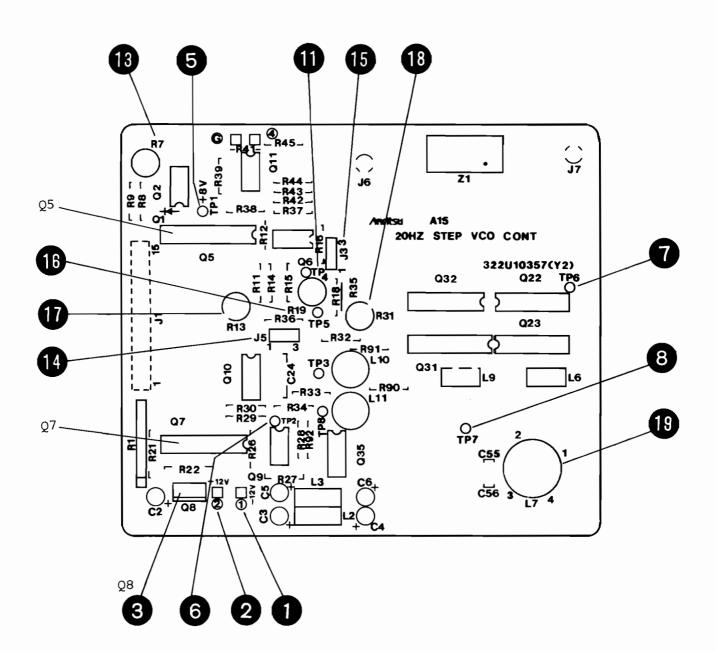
(a) A1-A15 20 Hz STEP VCO CONT PC Board Parts Layout (Parts Side) 14
